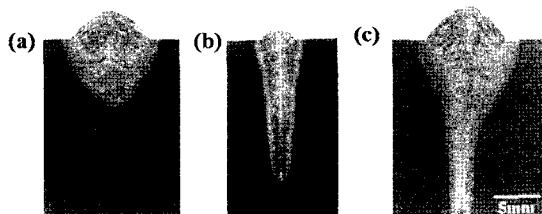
Bead shape of (a) MIG welding (14.3kW), (b) laser welding (12kW) and (c) MIG (13.9kW)-laser (12kW) hybrid welding<sup>14)</sup>
